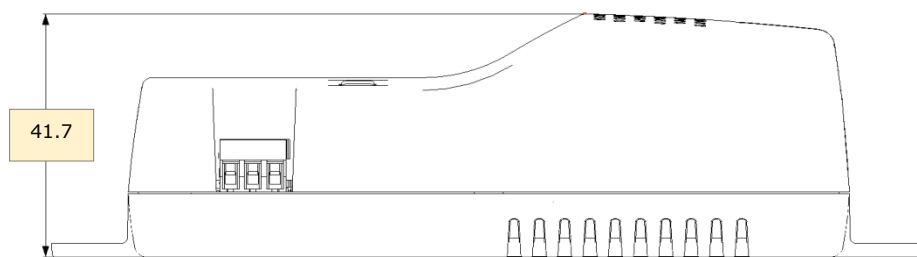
Modbus Trailing Edge Light Dimmer Dimension – Side View
